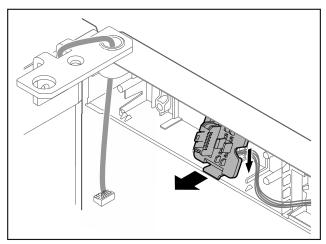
The installation position of the plug holder can be rotated by 180°.
